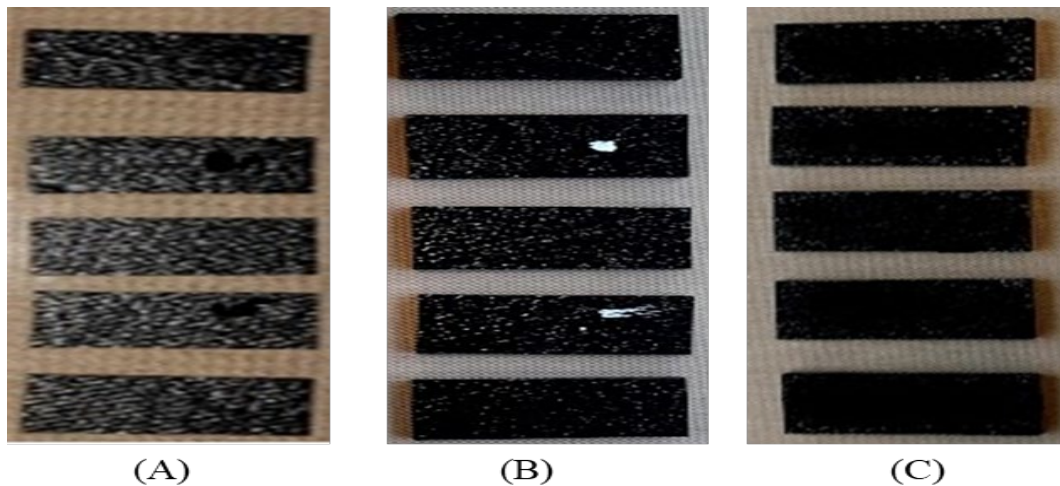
ILSS test specimens (A) Oven cured specimen (B) CM5 bar specimen (C) CM10 bar specimen.
